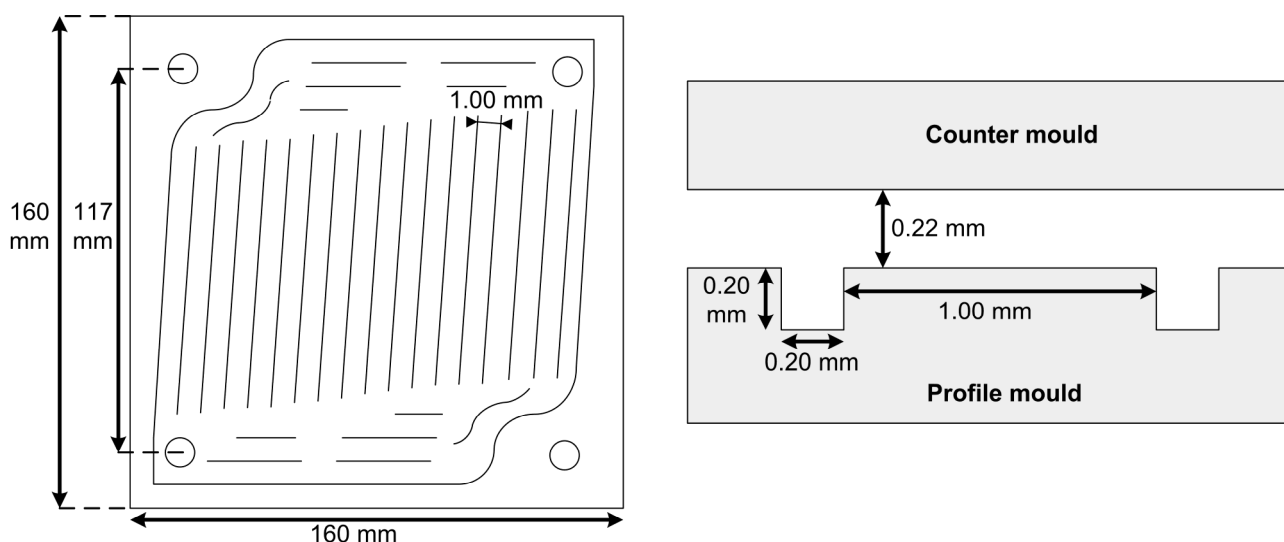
Drawing of moulds. Left: top view of profile mould (not on scale). The black lines indicate the grooves in the mould. Right: cross section at the middle of the moulds.
